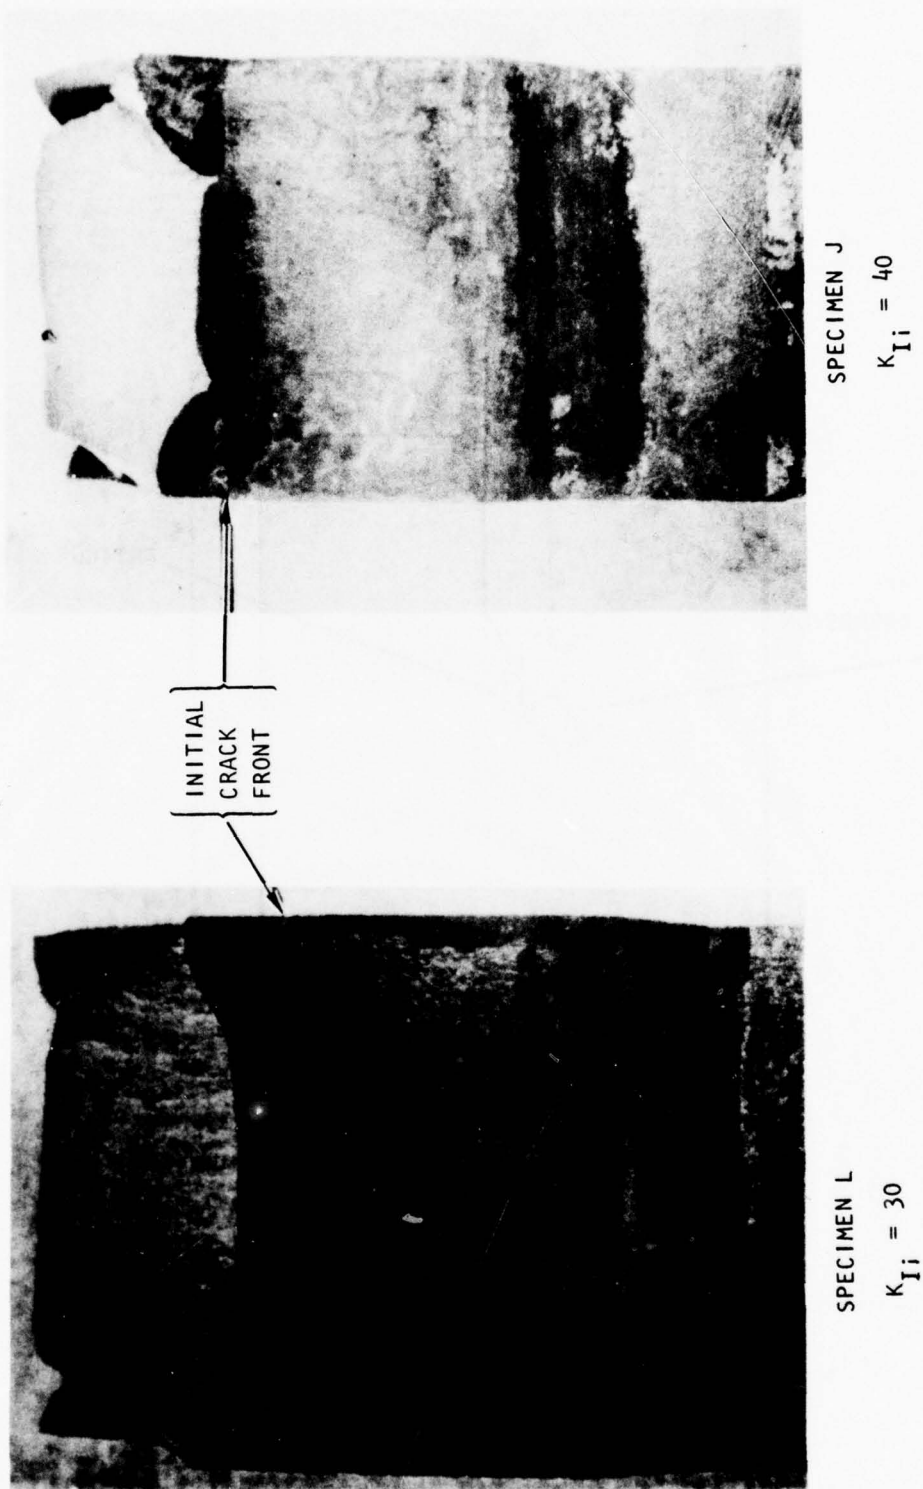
Fracture Faces of Typical Stress-Corrosion Specimens
